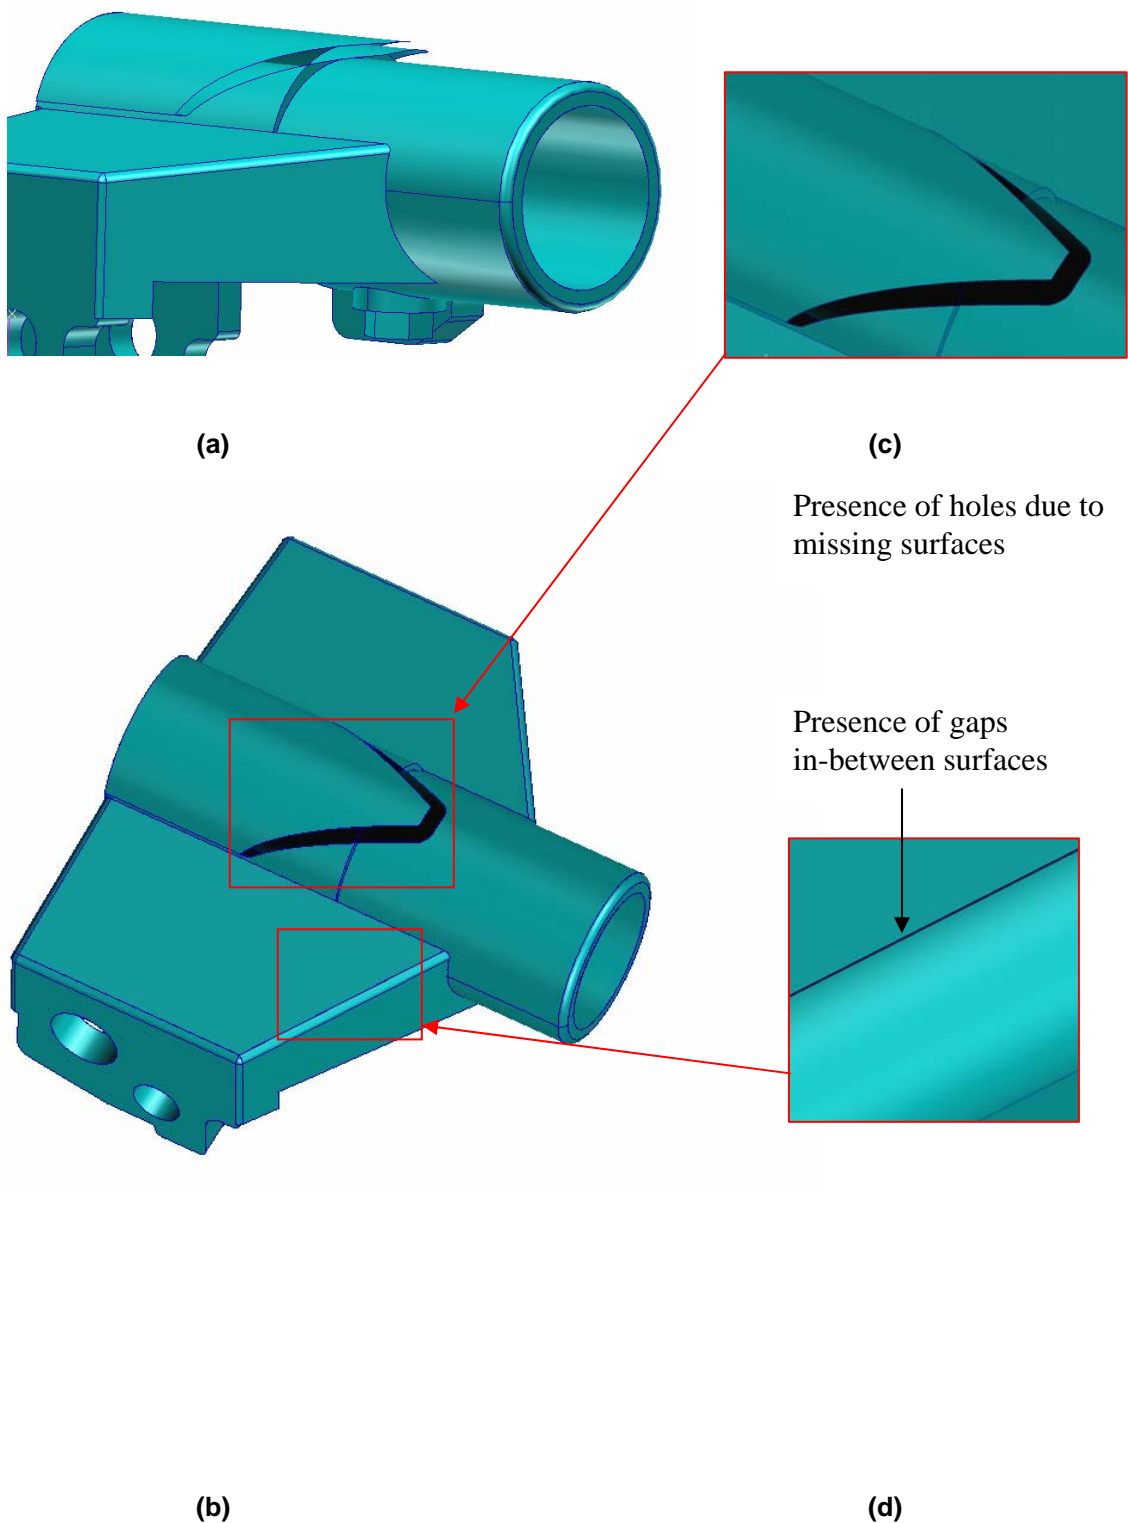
(a) View 1 of a defective geometrical model of a work-piece, (b) View 2 of the defective geometrical model, (c) Presence of holes in the model due to missing surfaces, and, (d) Presence of gaps in-between surfaces due to tolerance and truncation errors.
